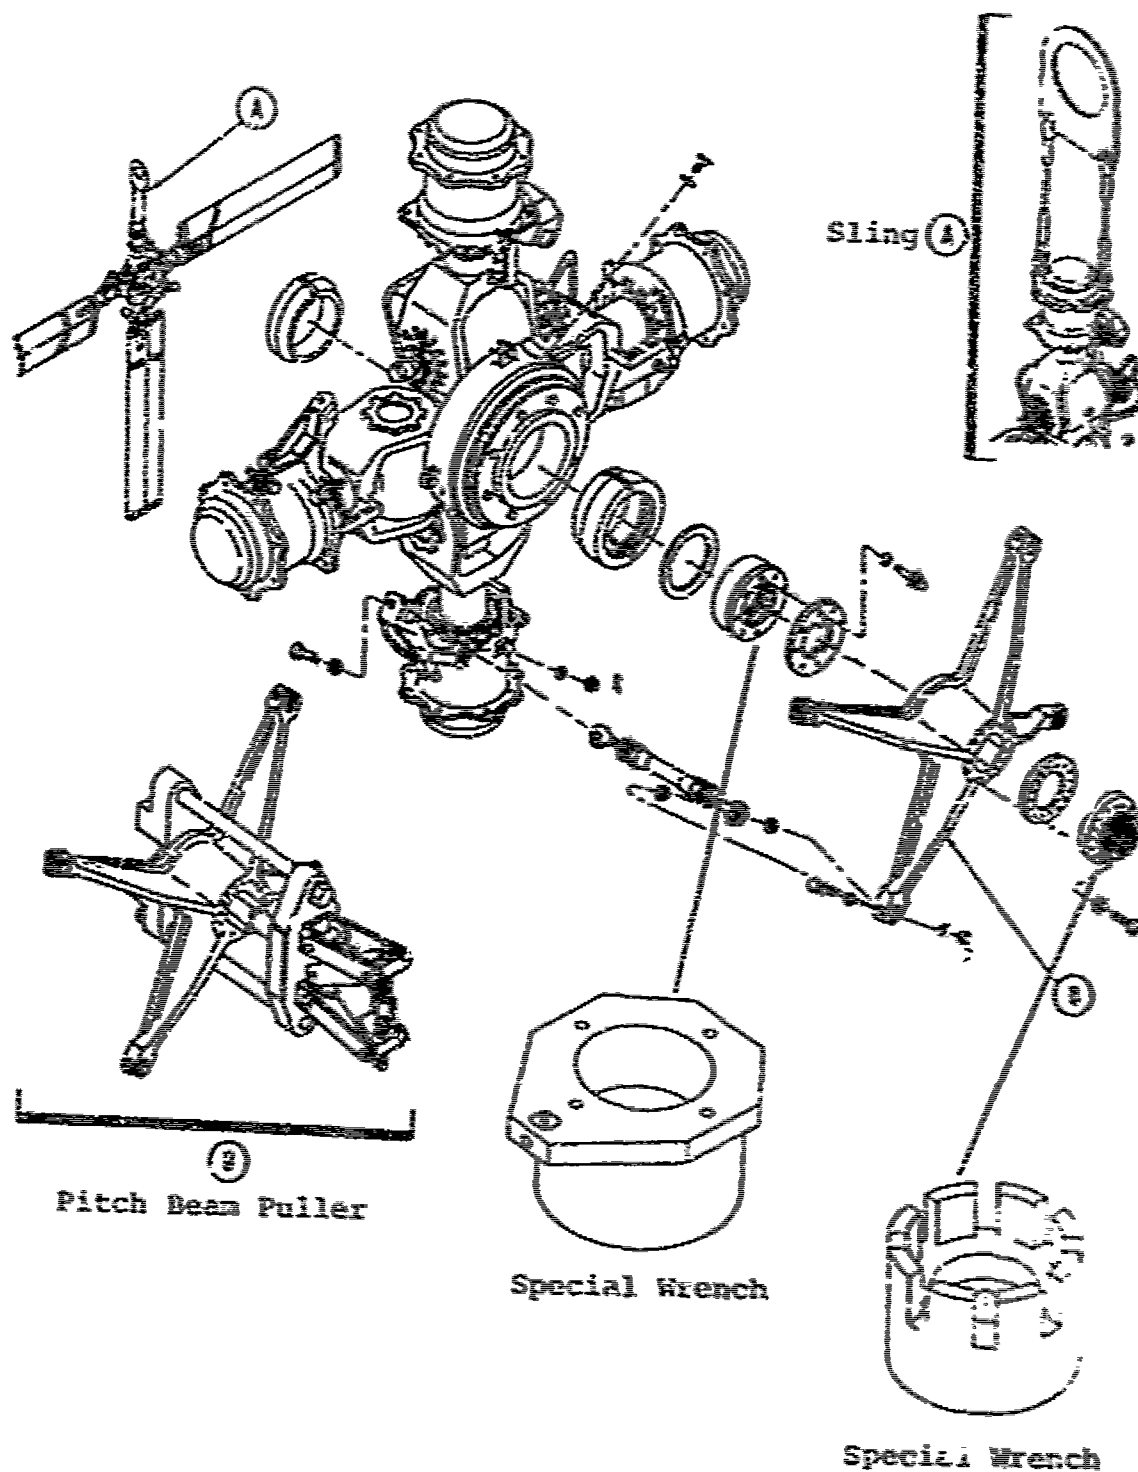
Tail Rotor Head Removal, CH-54 Helicopter.
